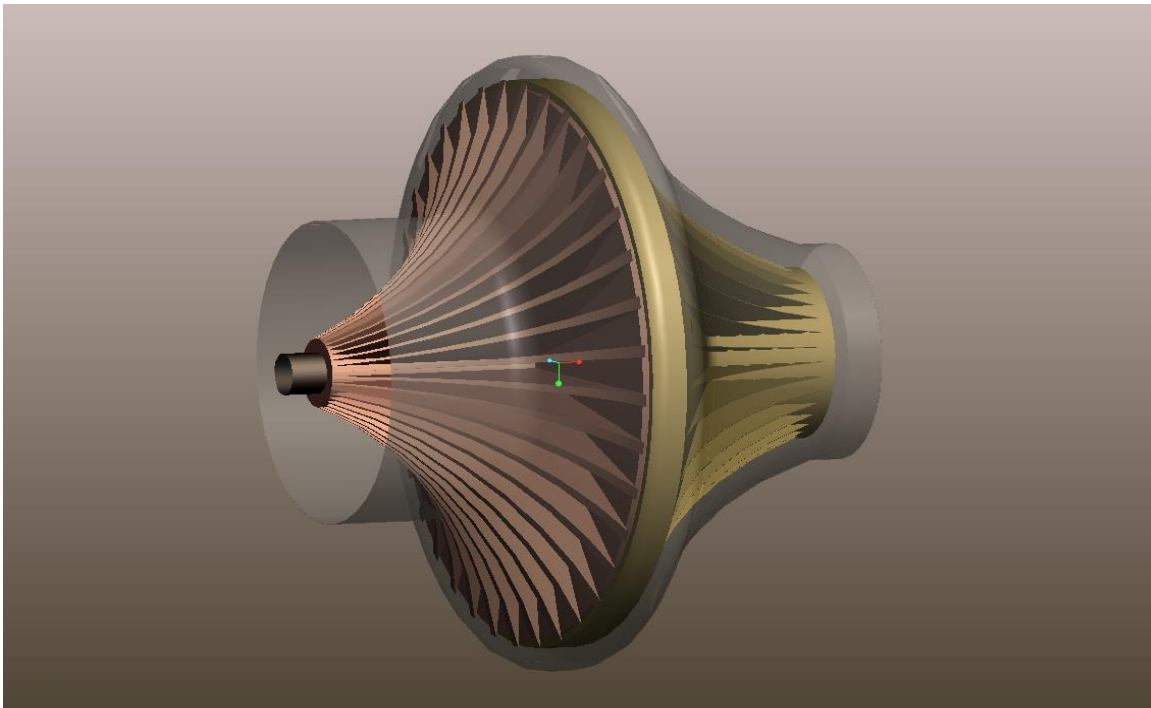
Rotating Impeller and Expeller in a Static Shell- -Isometric View
